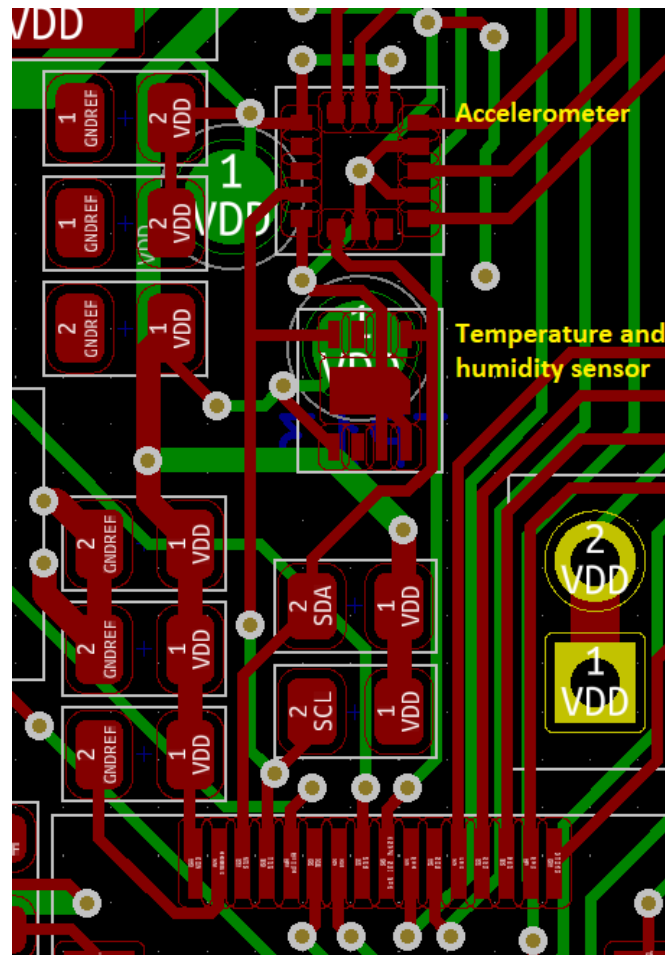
Accelerometer and temperature sensor routing on the PCB
